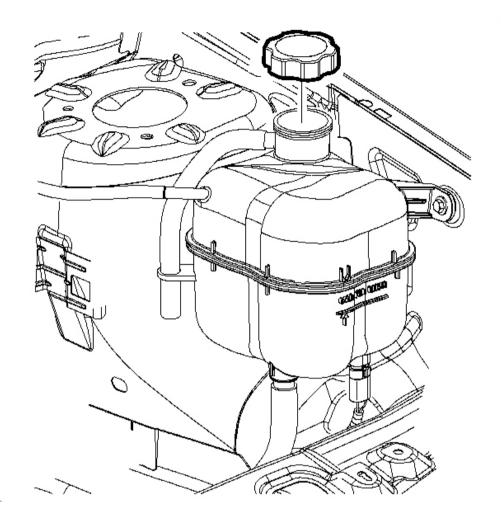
View Of Surge Tank Cap Courtesy of GENERAL MOTORS CORP.
